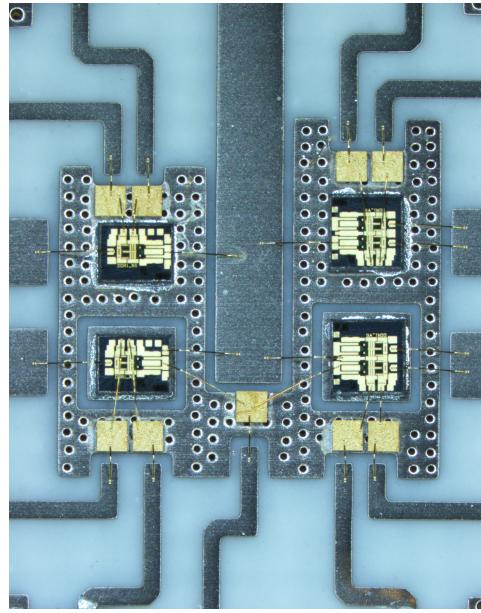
Photograph of assembled DDRi\_X6 & DDRi\_Y6 chips
